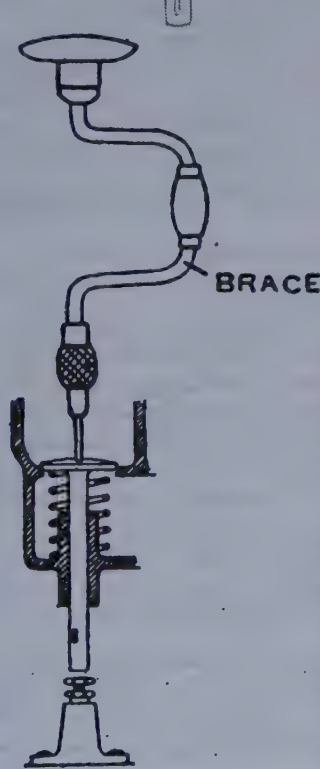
Method of Grinding-in a Valve Where the Seat is Not Removable. It will be noted that a small, light spring is placed temporarily under the valve head, the purpose of it being to lift the valve from the seat when the pressure of the brace or screwdriver is occasionally released. This prevents scoring of the surfaces or formation of ridges by the abrasive material. An ordinary screwdriver may be used, but a brace saves time. Before grinding in the valve should be examined to see that it is quite true. The stem may be slightly bent and require straightening. If the valve head is deeply pitted it should be relaced with a valve face trimmer.
